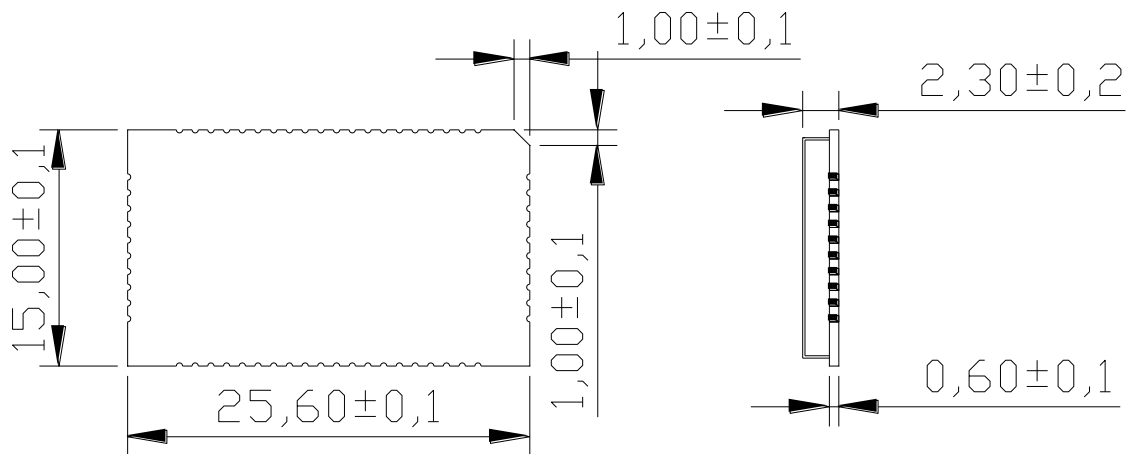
MC90-OpenCPU Top and Side Dimensions (Unit: mm)
